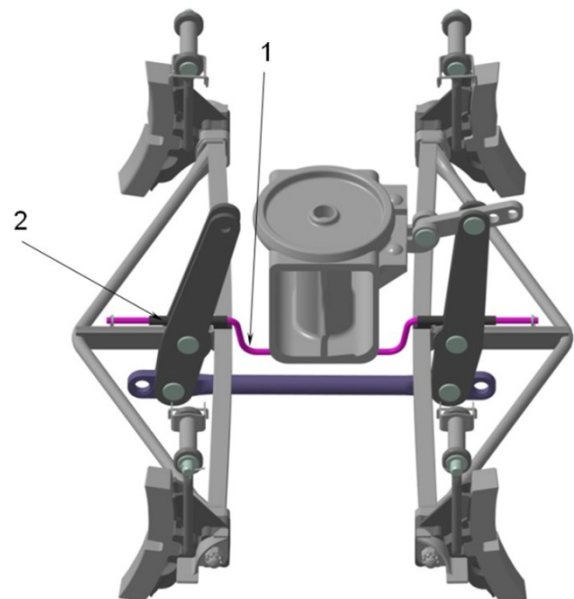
General view of the device for standard retraction of the pads from the wheels in the brake system of freight cars: 1 – curved guide bar; 2 – cylindrical sliders
